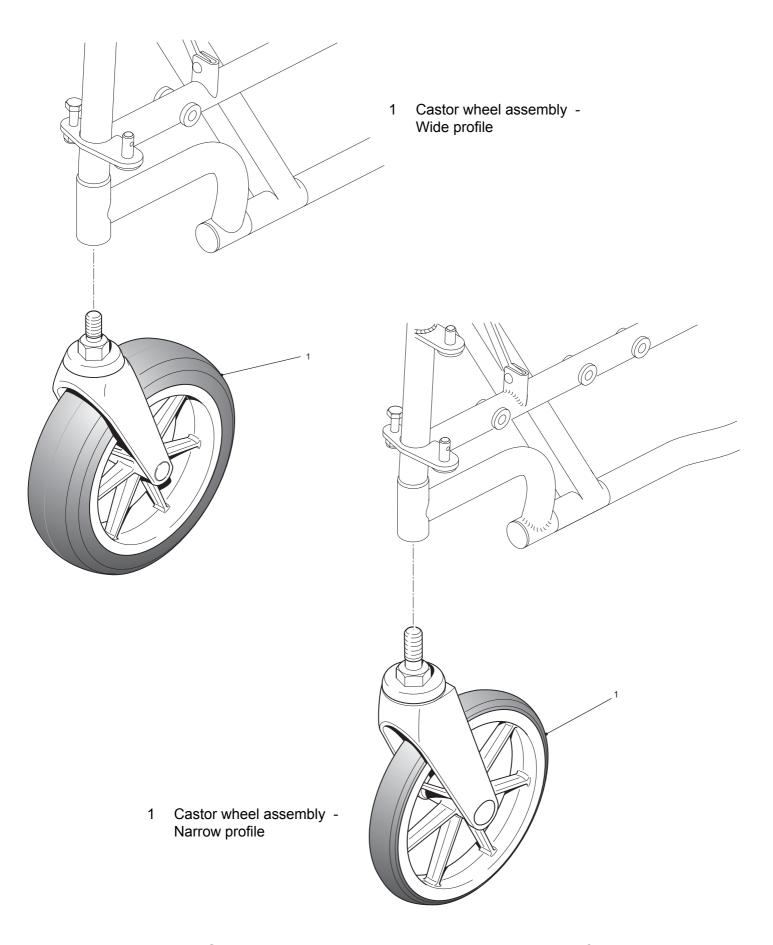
Castor Wheel Assembly (Wide and Narrow Profile)
